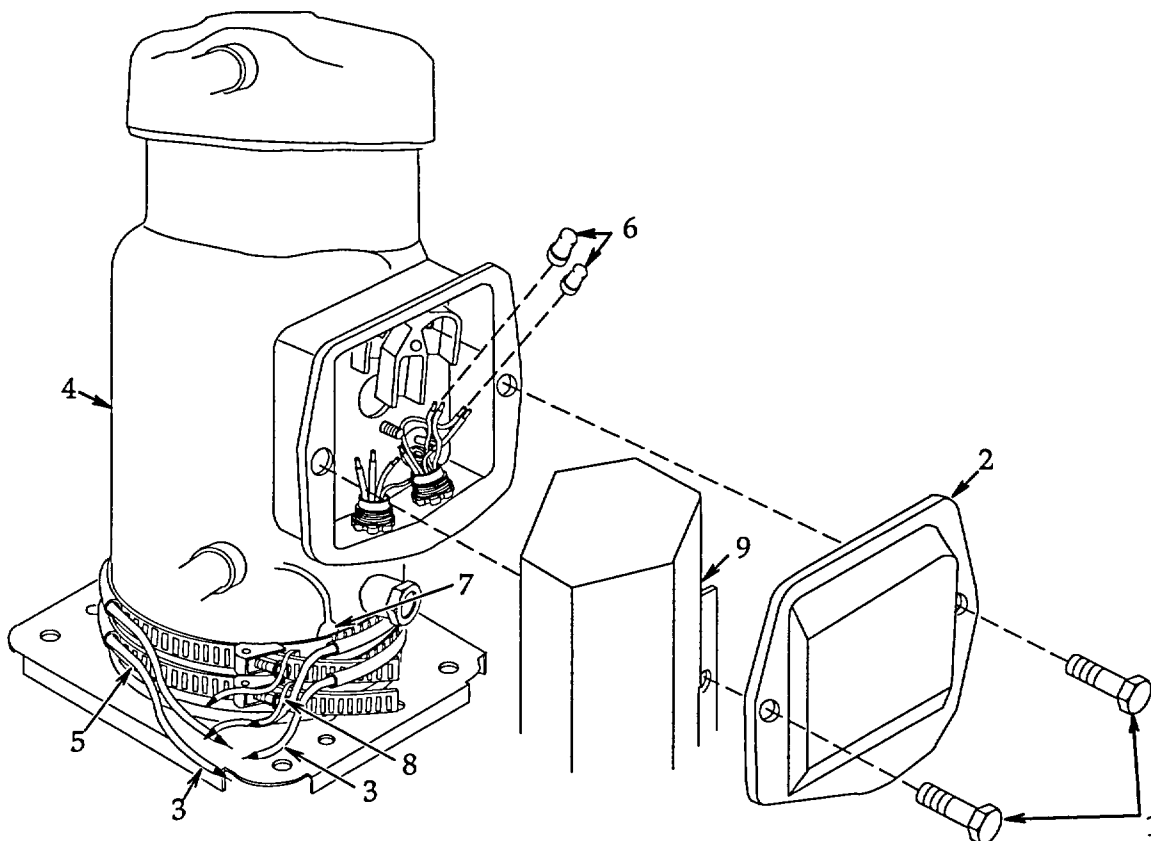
Crankcase Heaters (HR1 & HR8) (FDECU-2 ONLY).
